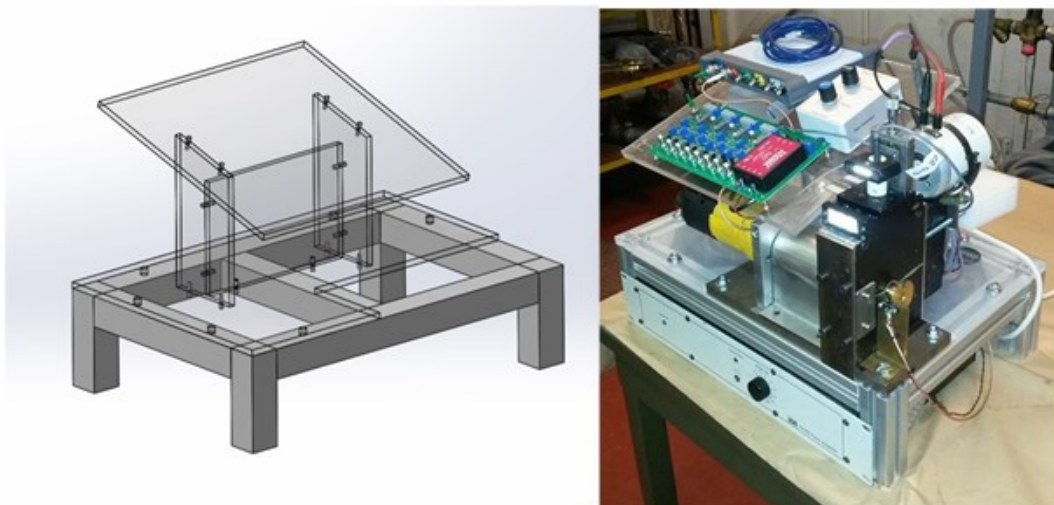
Left: the frame. Right: the assembly of the universal calibration bench
